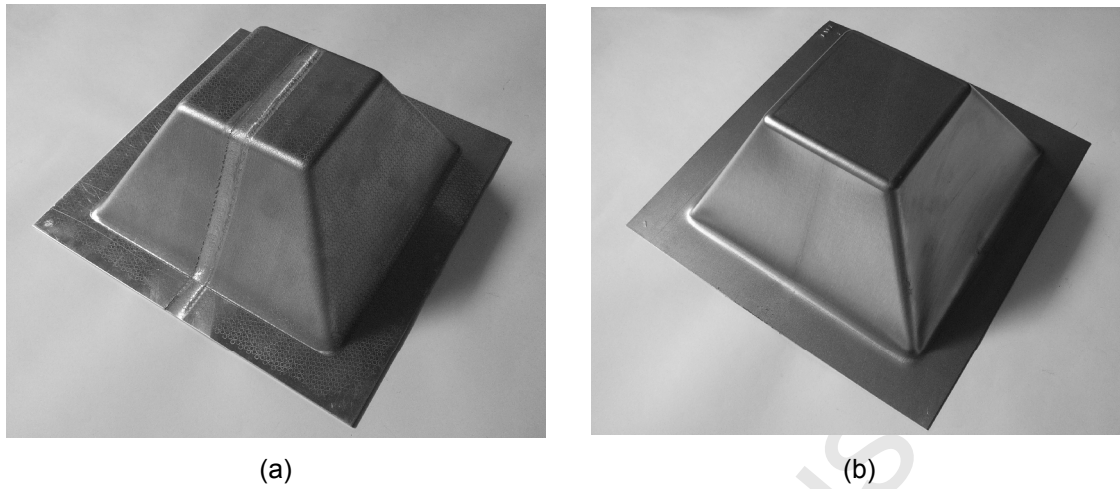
(a) Truncated pyramid shape with a constant drawing angle $\psi = 60^\circ$ produced by SPIF of a TWB of Aluminium AA1050-H111 with a uniform 2.0 mm thickness profile. (b) Dummy sheet of DC04 deep drawing steel with 0.63 mm that was utilized for protecting the welding joint from the rotating single point forming tool.
